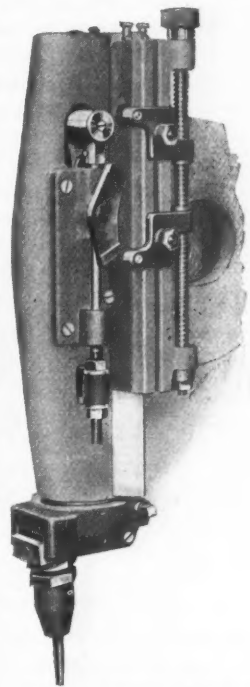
Detail View of Shaper Ram showing Relief Mechanism
